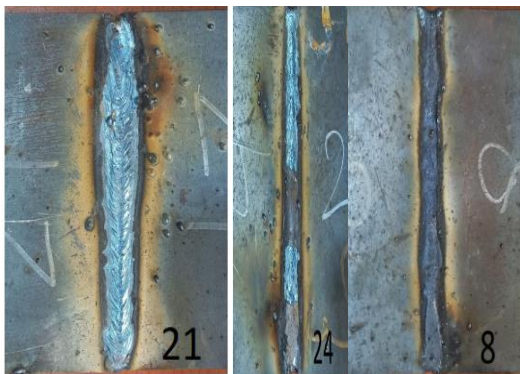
Representative welded specimens after welding and before mechanical testing.
